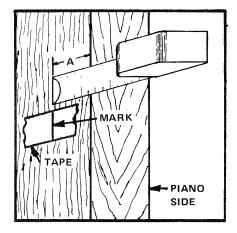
Measure dimension A and mark the tape as shown.
